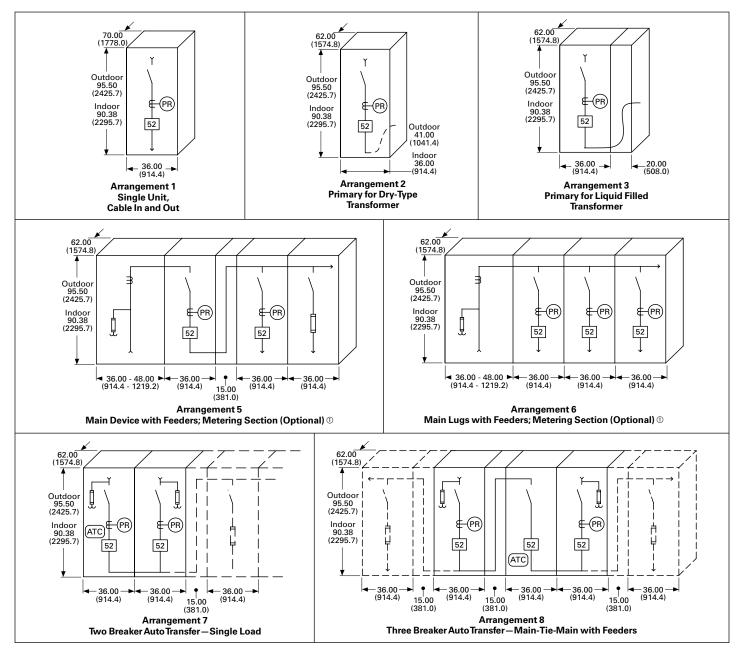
Layouts and Dimensions in Inches (mm)
